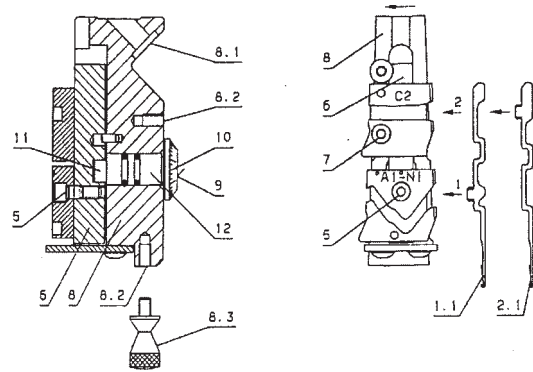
Dial camming at OV 3.2 circular machine with large diameter Section view and interior view
